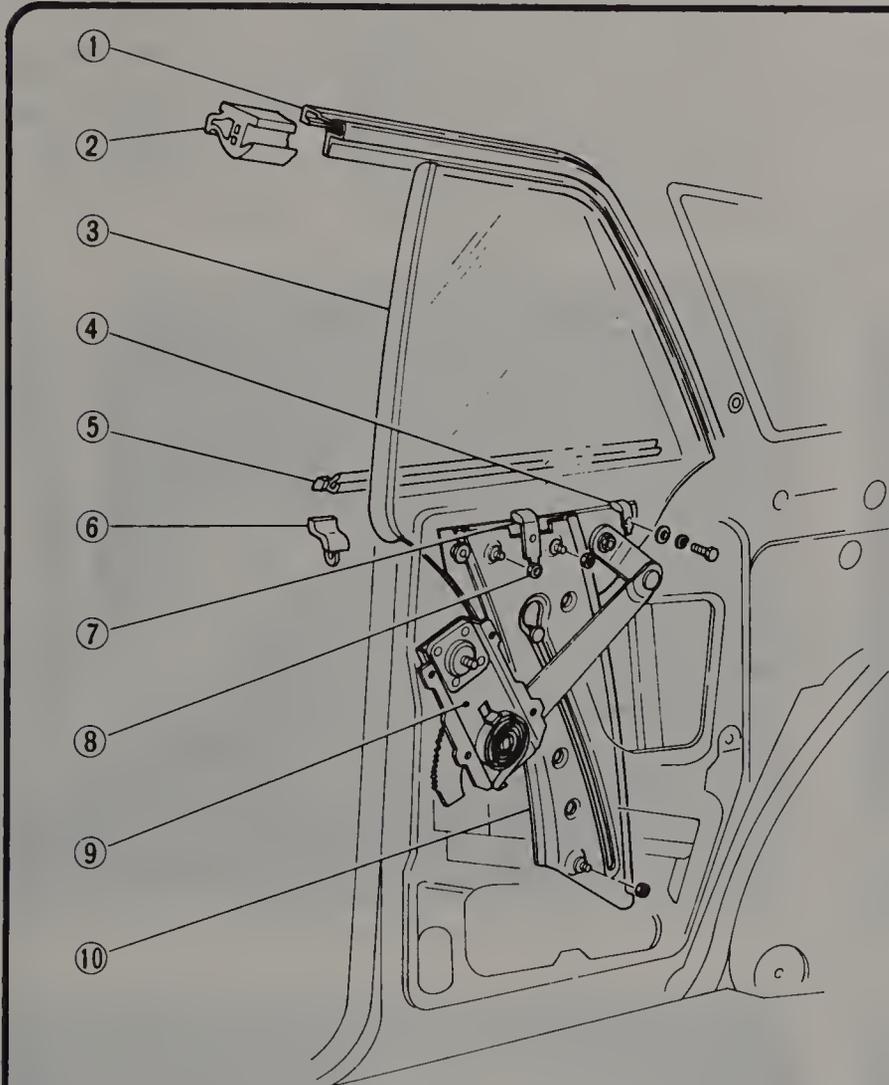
Hardtop side window components – exploded view (Sec 10)
